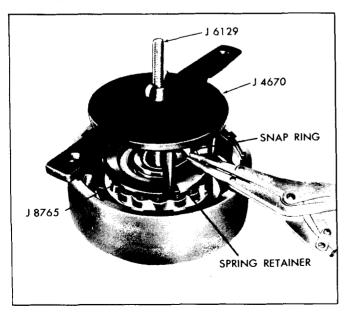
E-117 Removing or Installing Spring Retainer Snap Ring
